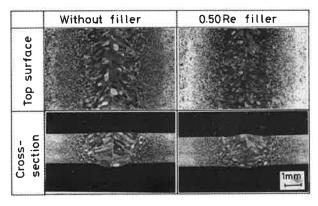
Macrostructures on top surface and crosssection of AM-TZM welds without and with Re filler metal.
